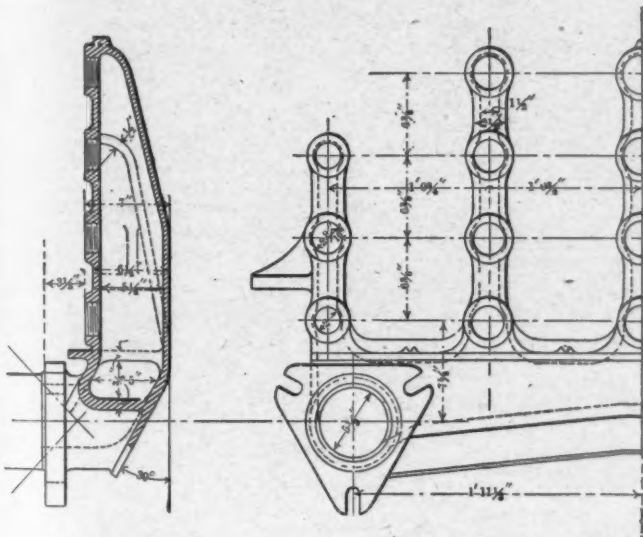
BOTTOM OR SUPERHEATED STEAM HEADER.
